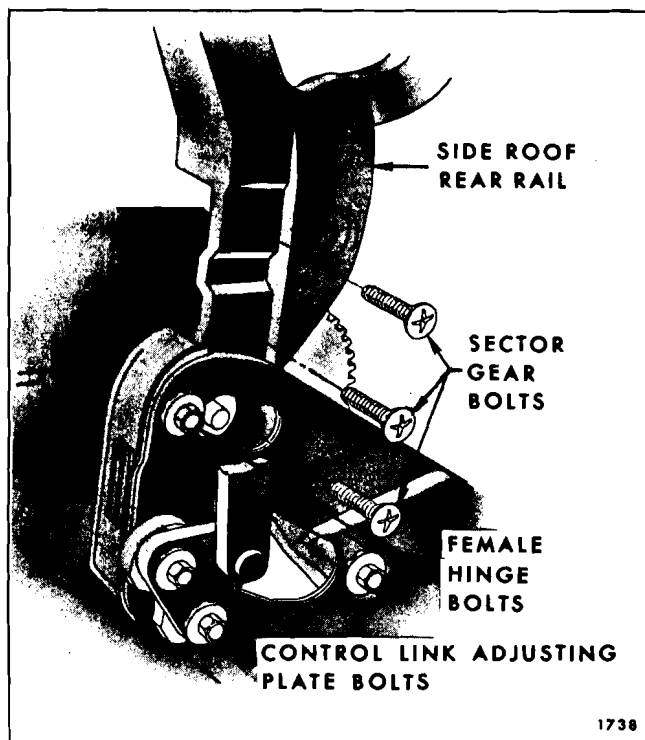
Actuator and Top Control Link Attachment - "Z" Styles
